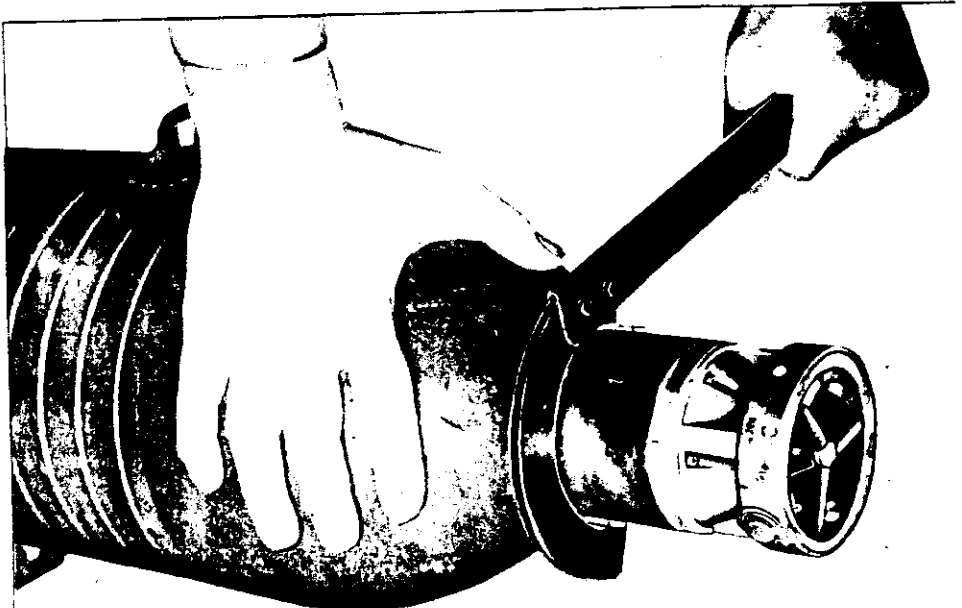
INSTALLING RING TYPE VT FUZE WITH SPECIAL FUZE WRENCH
